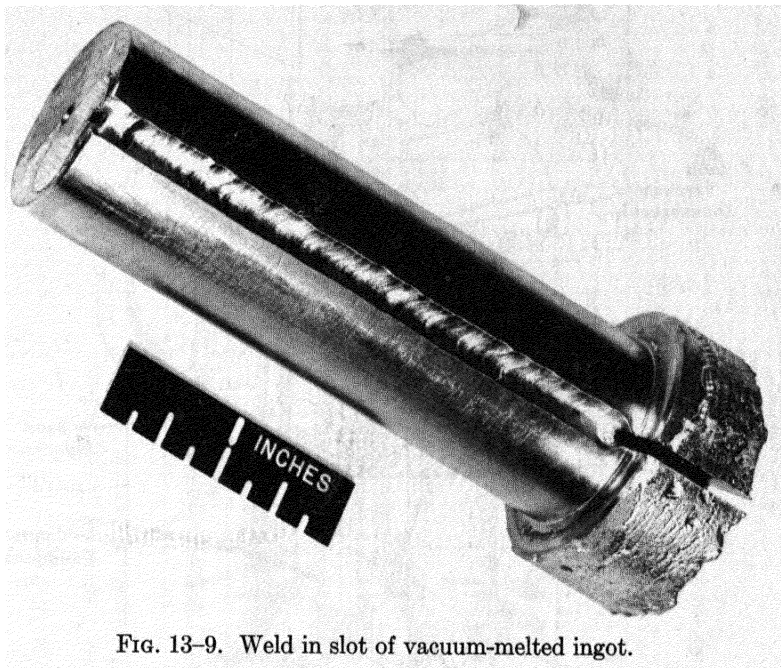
Weld in slot of vacuum-melted ingot.
